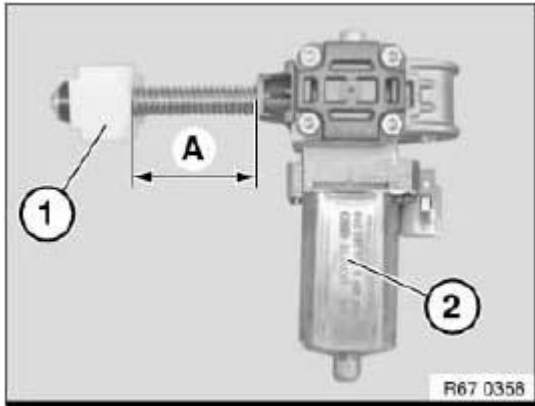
Identifying Holder And Seat Tilt Adjustment
